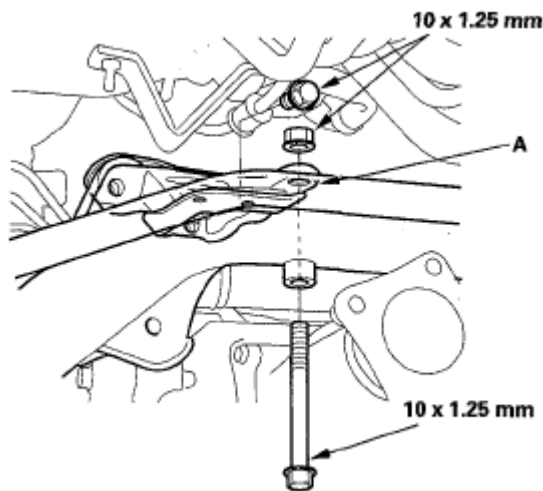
Identifying Gearbox Stiffener Bracket From Left Side Of Front Subframe
